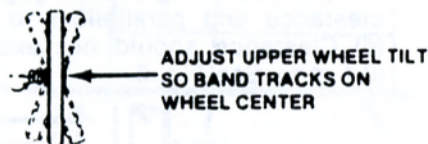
ADJUSTING UPPER WHEEL TILT.
